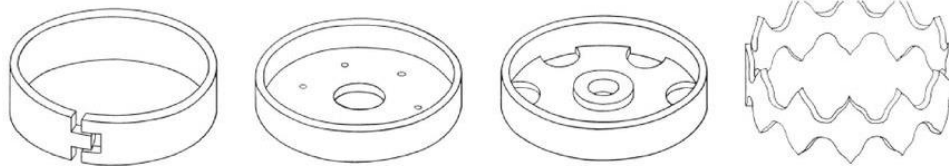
Examples of bearing type fasteners a) split-ring connector; b) Pressed steel shear plate; c) Malleable Iron shear plate; d) Toothed ring connector [19]
